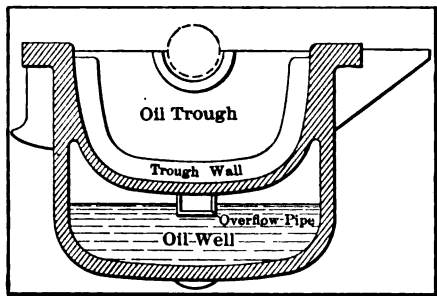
Form of transverse section through crankcase of splash lubricated motor
